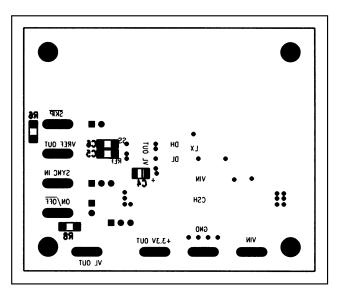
MAX797 EV Kit Component Placement Guide—Solder Side
